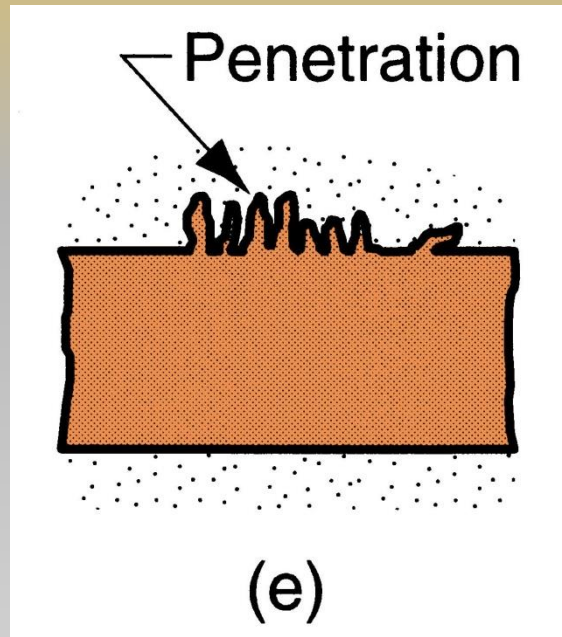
Common defects in sand castings: (e) penetration
